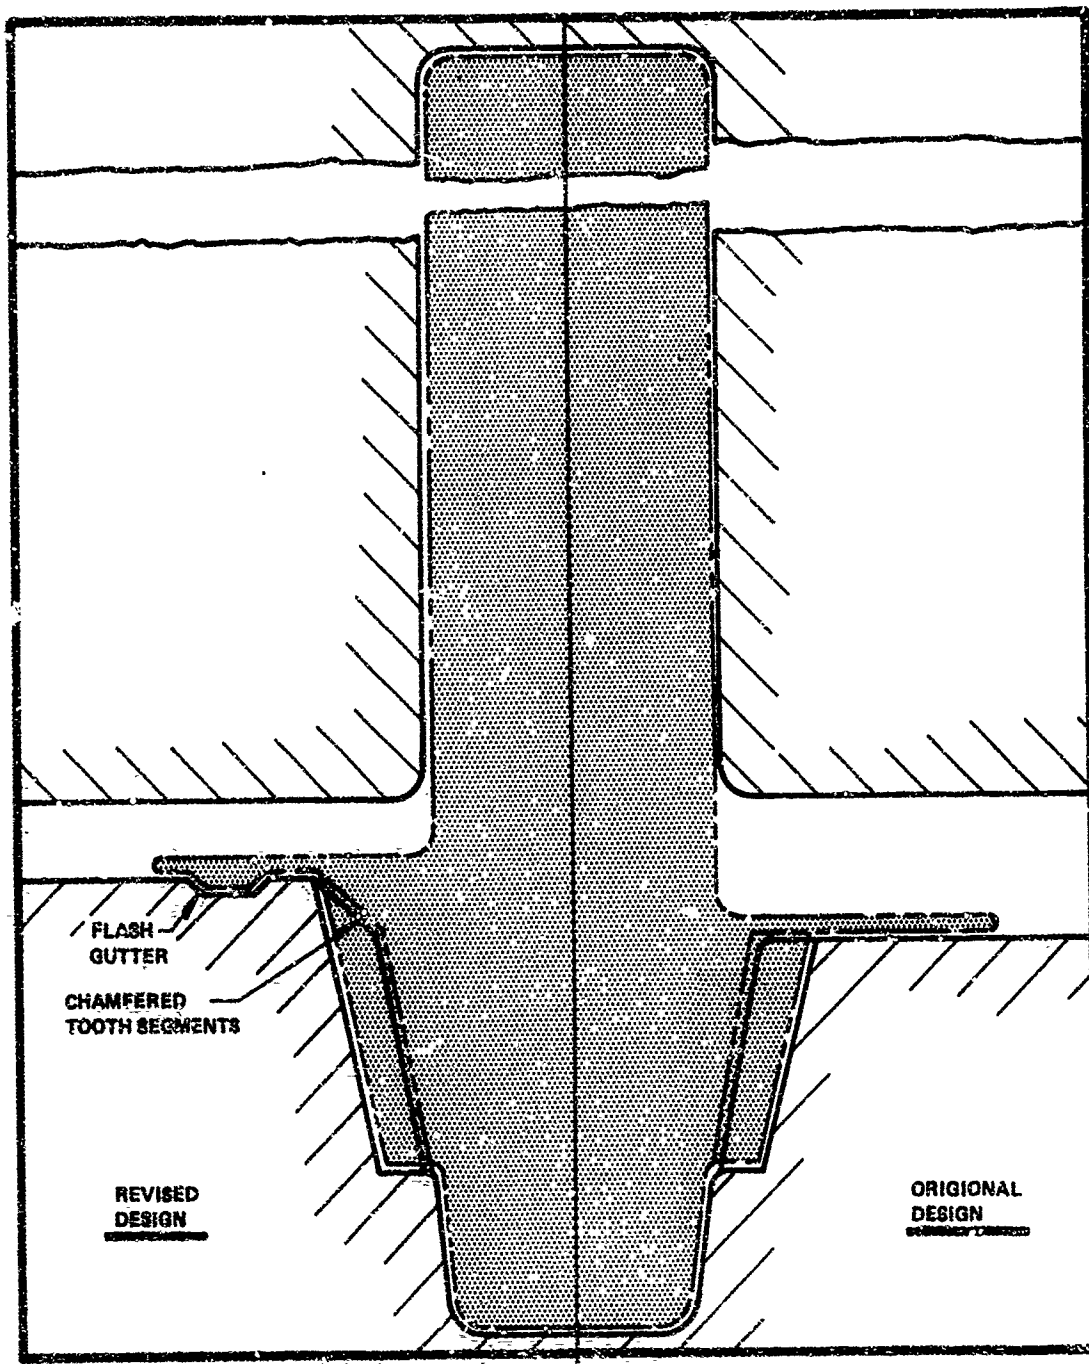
Original and Revised Design of the Spiral Bevel Pinion Block and Finish Dies
